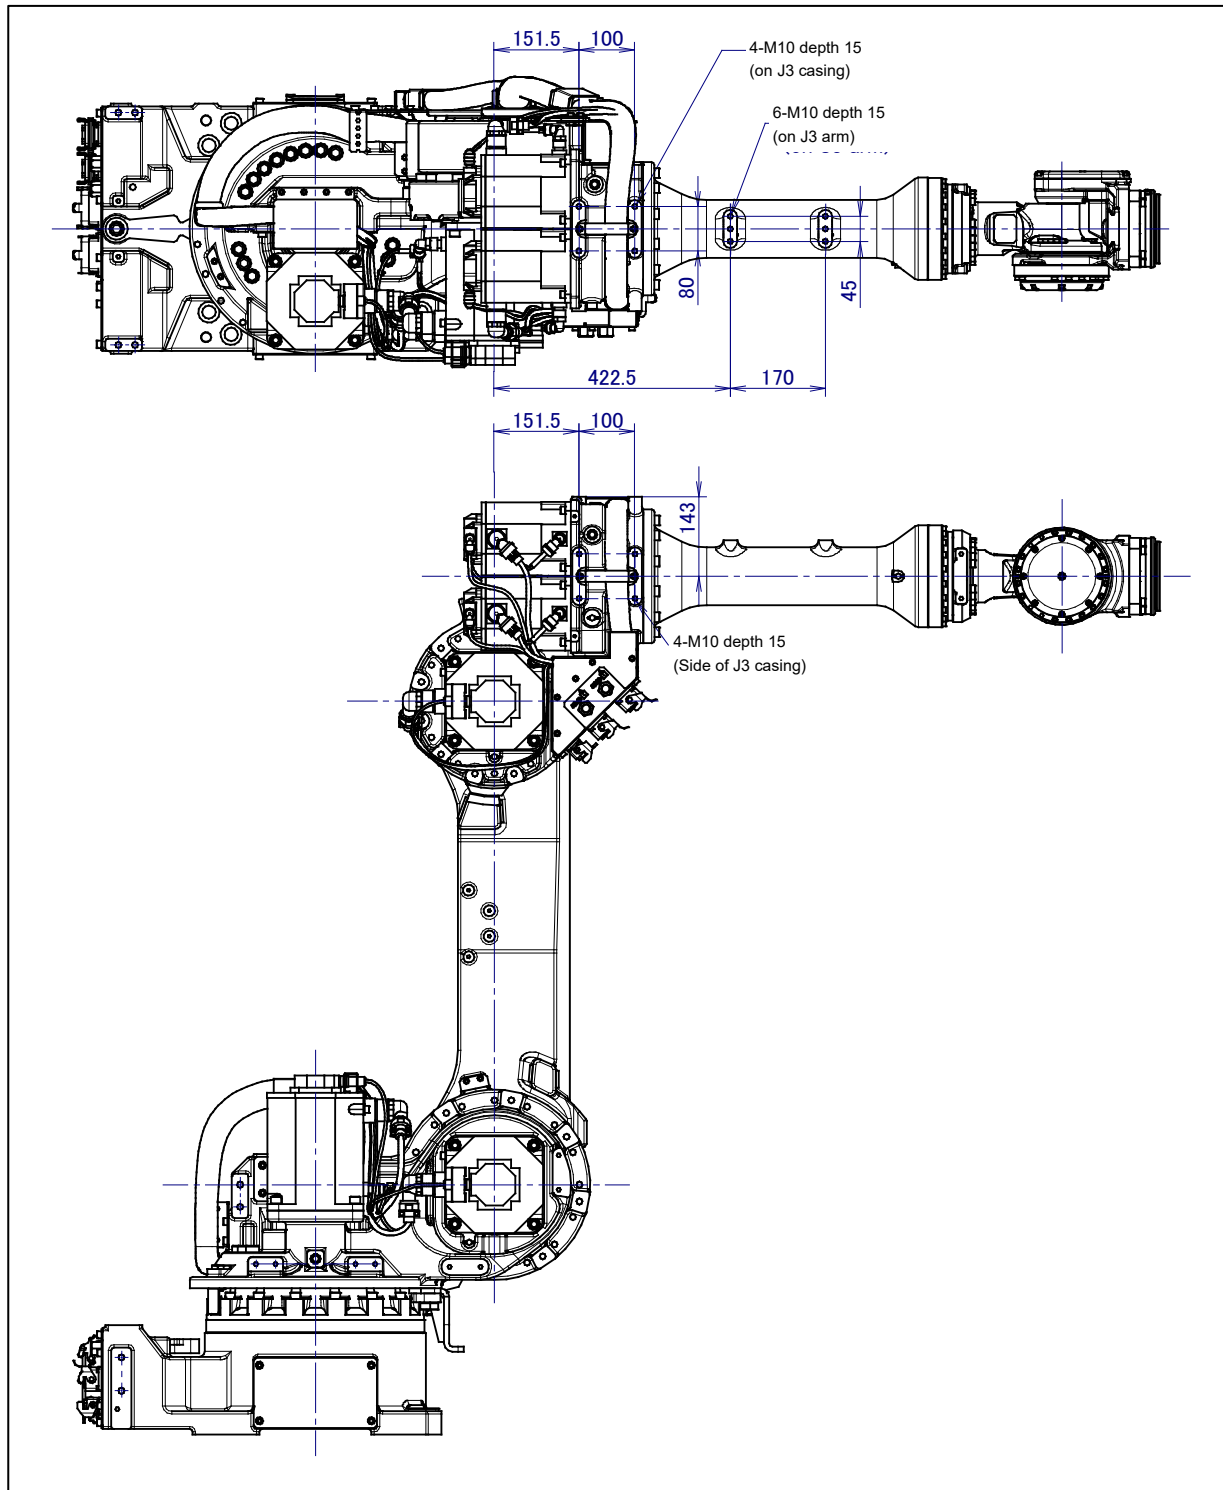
(a) Equipment mounting faces (R-1000iA/80F/100F/130F/80H)
